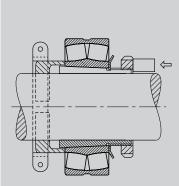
Dismounting of Adapter Sleeve by using Stop Nuts
